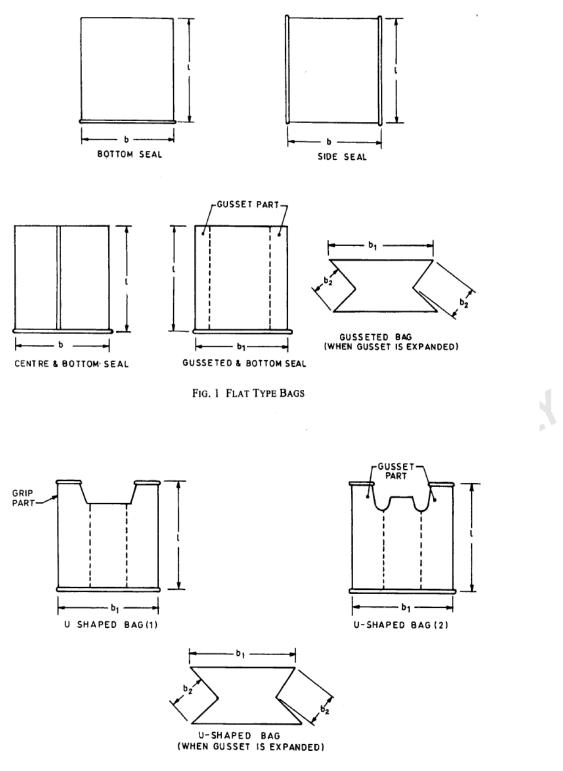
U-SHAPED BAG GUSSETED TYPE
